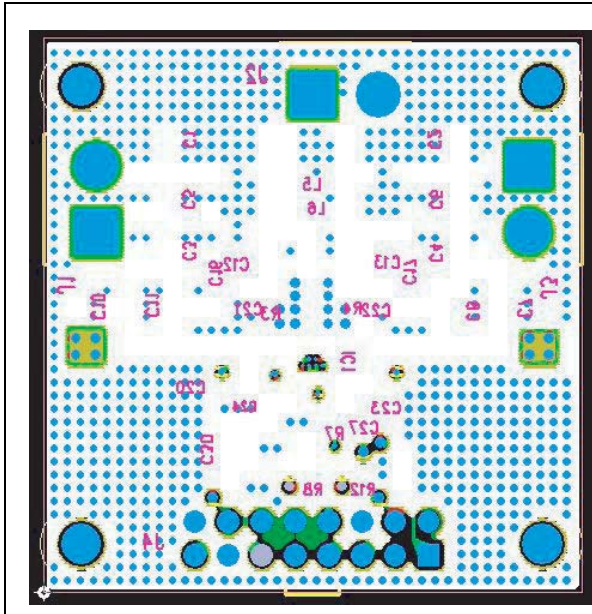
PCB layout recommendation - large ground plane on the inner layer 2
